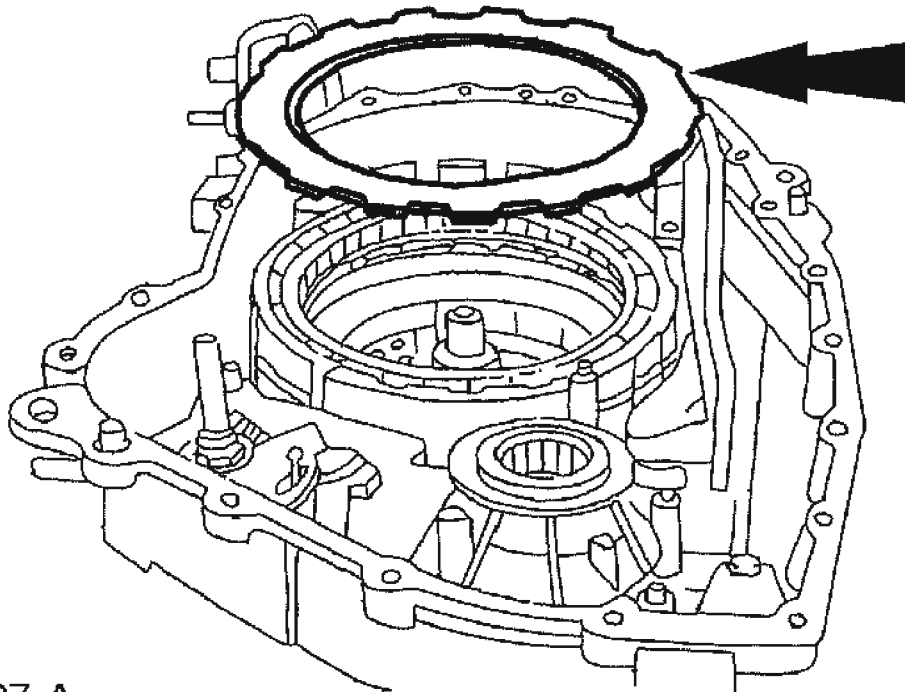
Removing No 1 Pump Support Thrust Bearing And Tag For Installation
